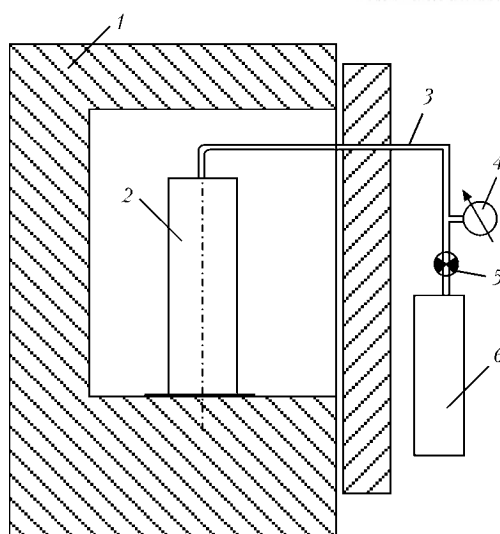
Scheme of carrying out autonomous vacuum brazing: 1 – thermal furnace; 2 – pilot billet; 3 – vacuum conductor; 4 – manovacuum gauge; 5 – gate valve; 6 – forevacuum pump
